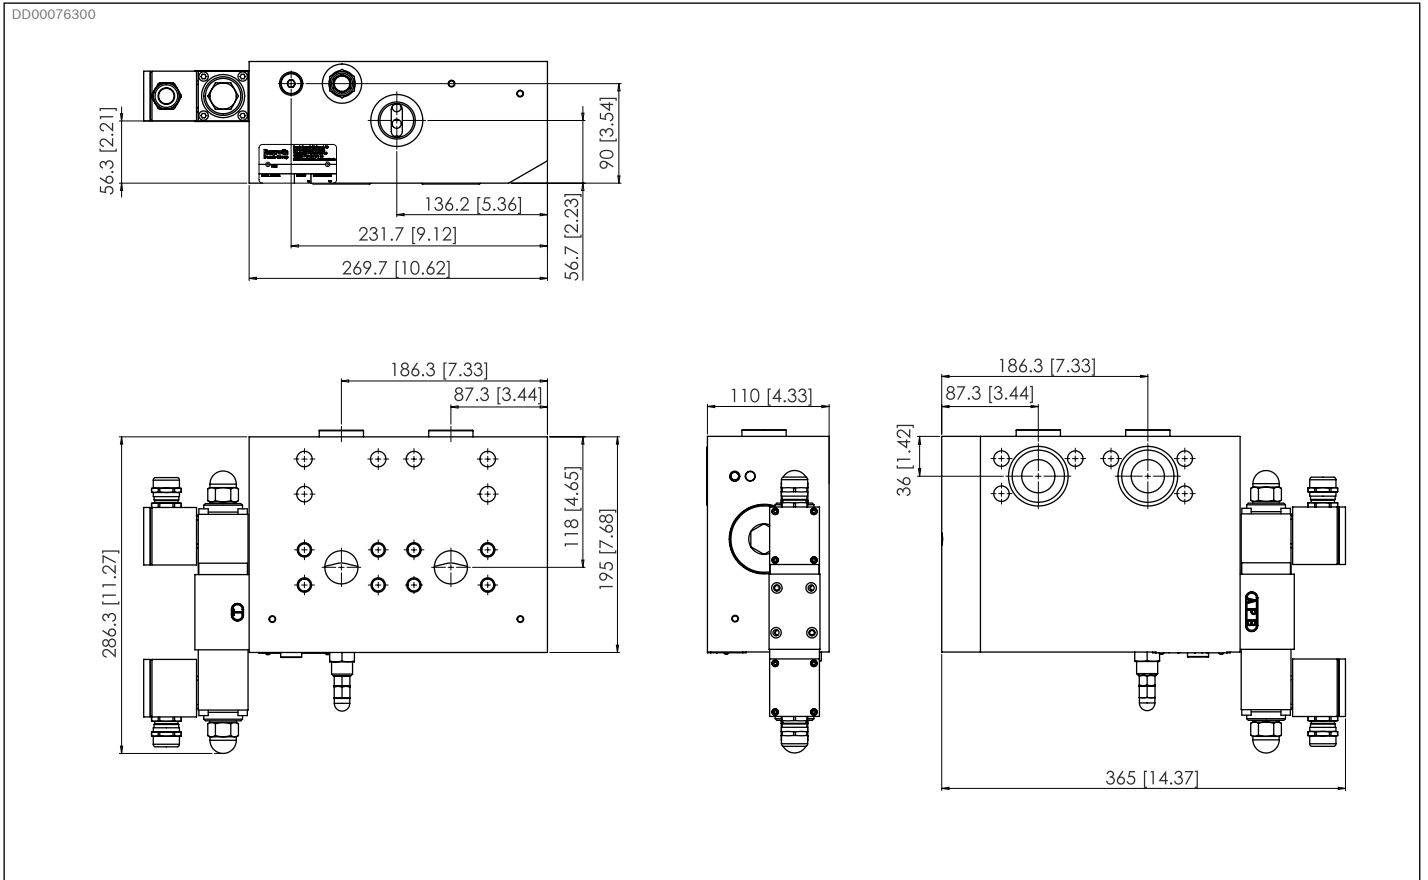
Dimensions VFWCB 600 E, Sea water protected pilot valve
